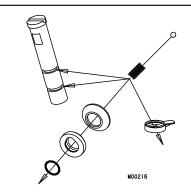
Clean O-ring grooves, seal and nozzle with brush.
